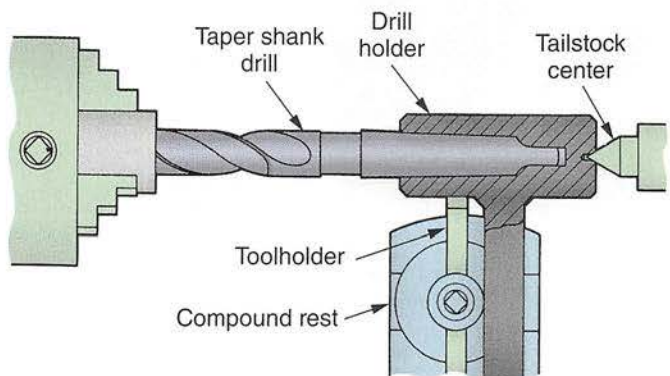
Drills larger than 1/2" (12.5 mm) in diameter are usually fitted with a self-holding taper that fits into the tailstock spindle of the lathe.
